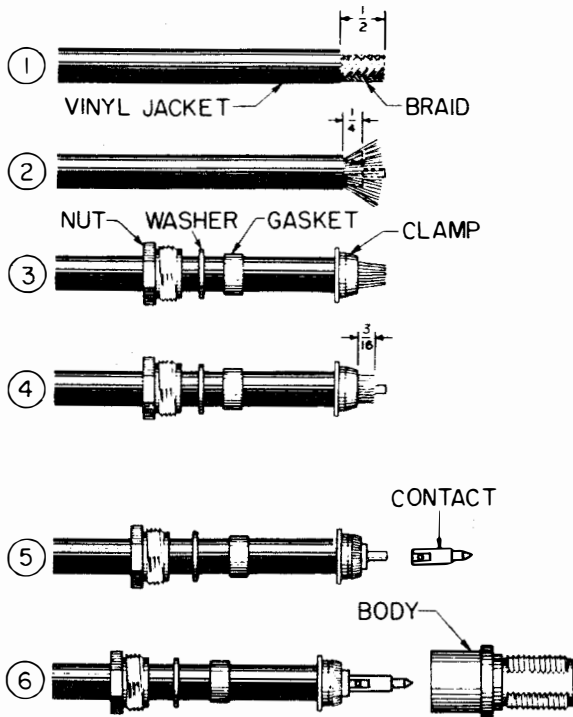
Assembly of Type UG-21D/U Plug Connector to Cable
